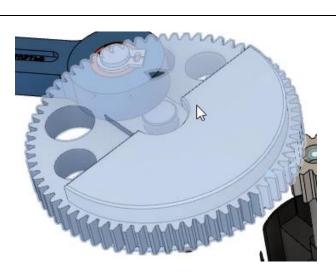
Open the As-Built Joint tool and choose the first Components selection
